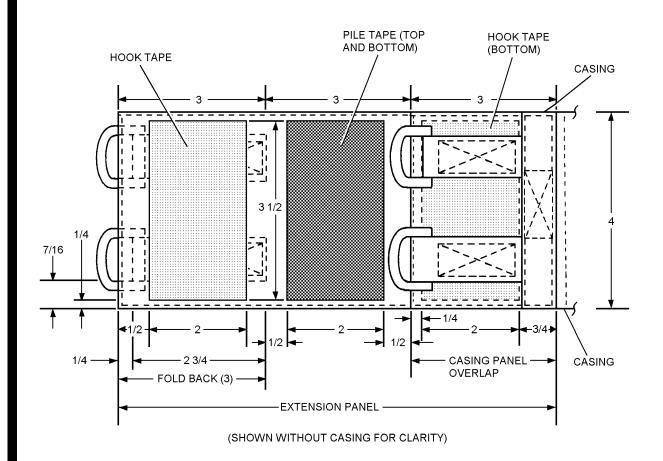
A. Fabrication of Casing Assembly Extension Panel
